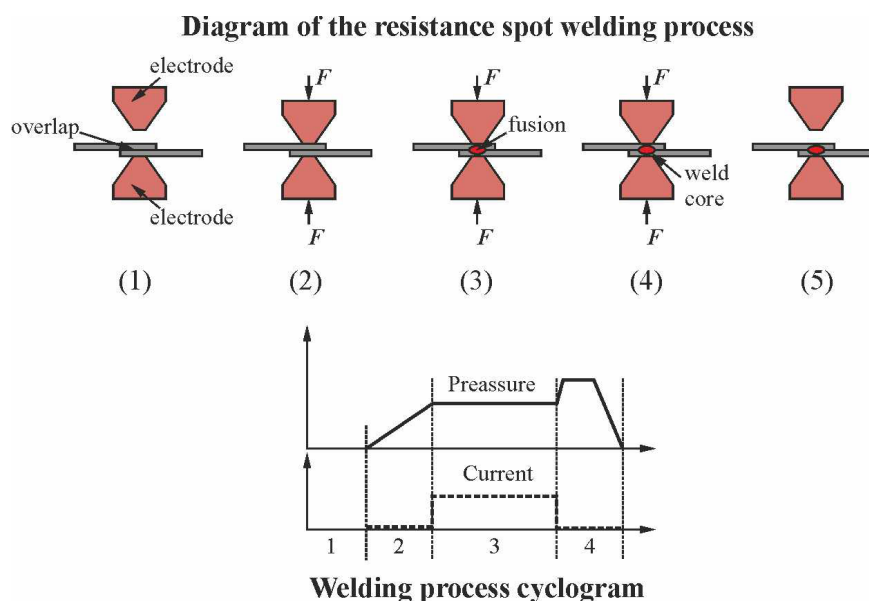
Process scheme and cycle diagram of resistance spot welding (RSW)
